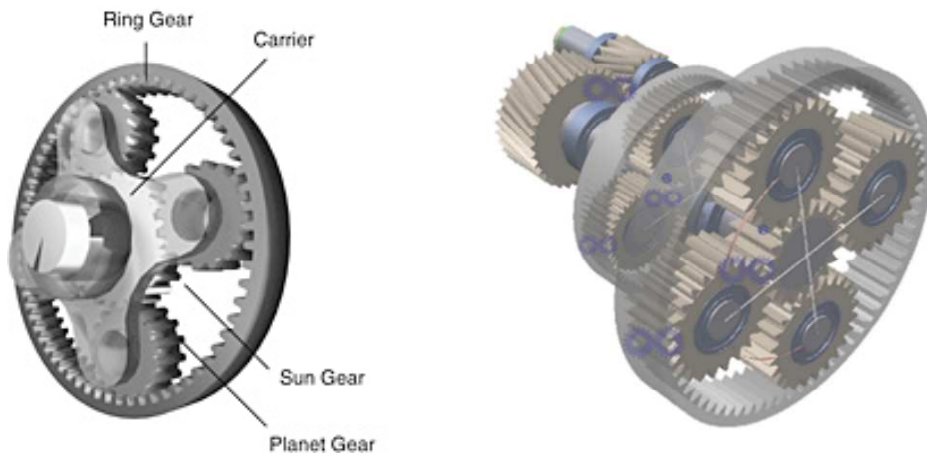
Left: Single stage planetary helical gearbox topology. Right: Multi stage planetary helical gearbox topology [99]
